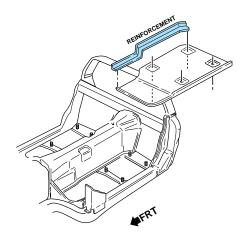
Reinforcement Bonded to Tunnel and Floor
